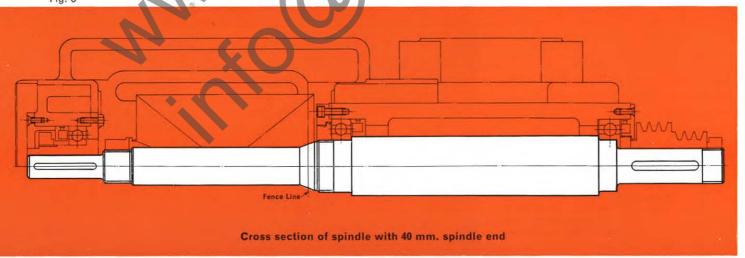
All spindles and housings are of robust design to ensure vibrationless running. Spindle is mounted in deep groove ball bearings. Horizontal spindles have outboard bearings. Bearings are spring loaded to prevent lateral movement of the spindle and ensure accurate jointing. Spindles are lubricated by a patented spray system for long life. Cutterblocks are cone mounted.
